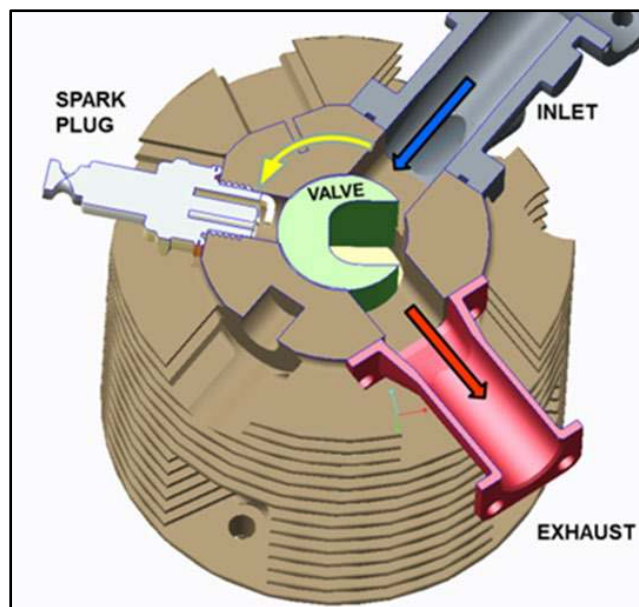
RCV DF engine – section through the rotary valve, ports, and sparkplug.
